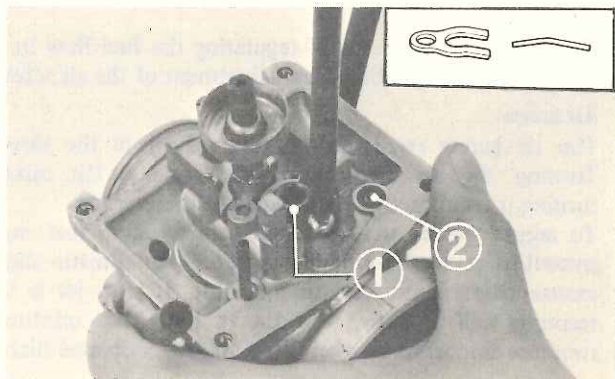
(1) Valve seat set plate (2) Power jet
